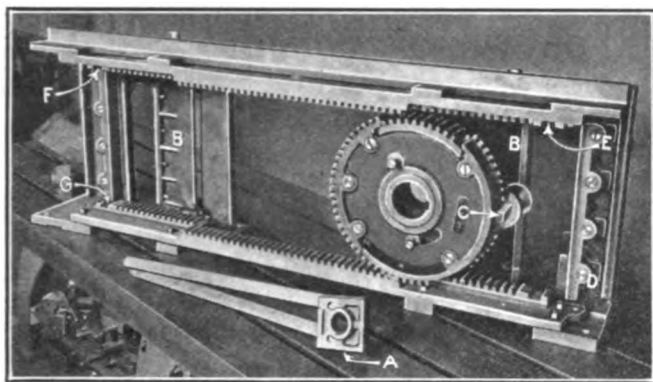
GEAR AND RACK OF THE PREMIER PRINTING PRESS
